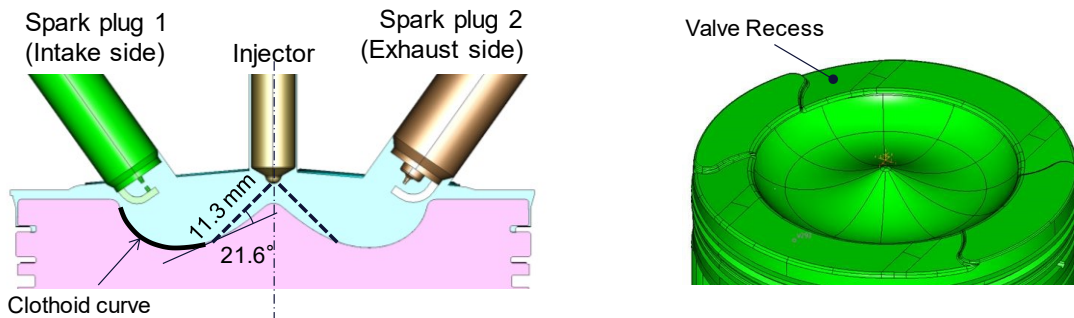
Combustion chamber and piston geometries of the concept engine
